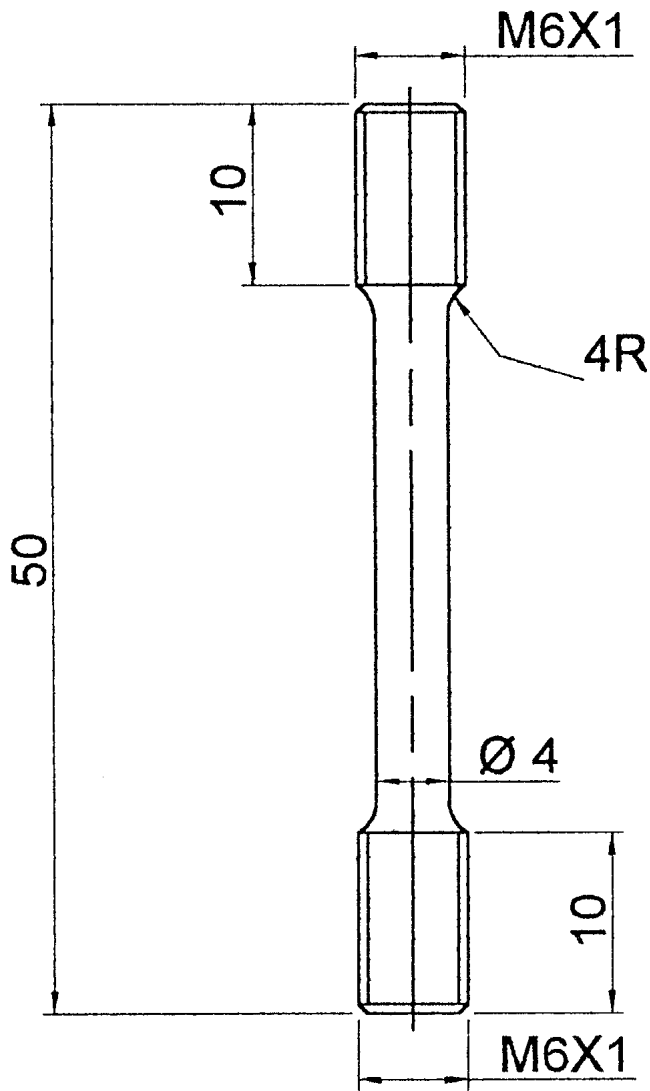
Geometry of SCC test specimens. All dimensions are in millimeters.
